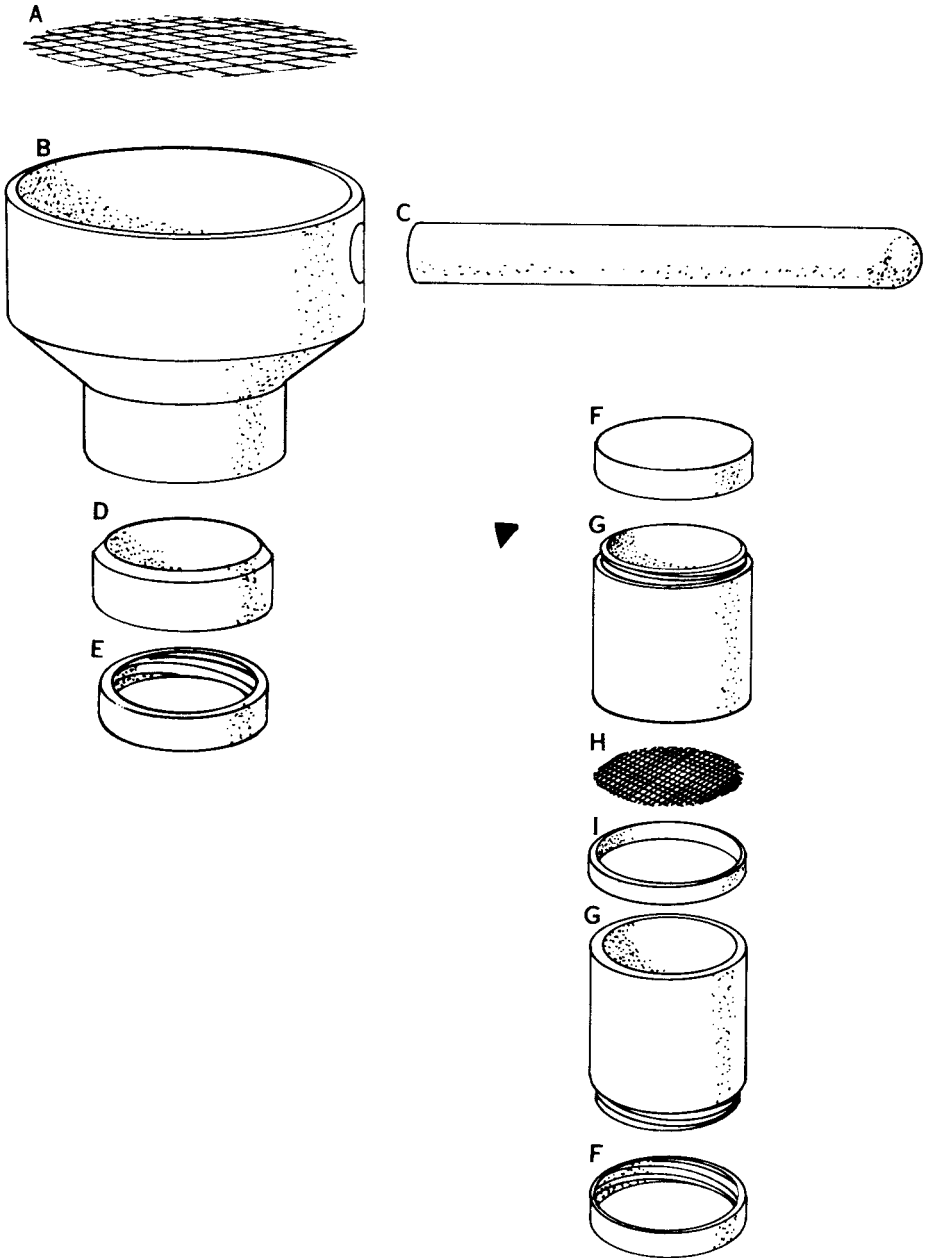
Exploded diagram of improved portable immature mosquito concentrator system.
